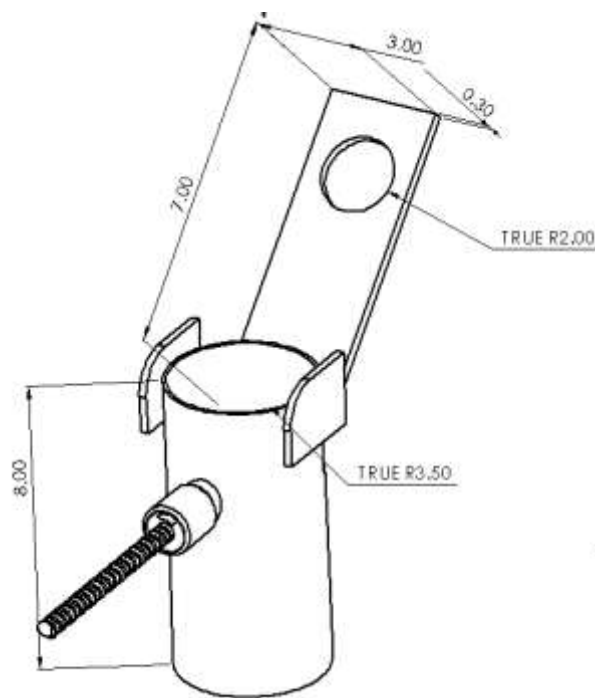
Dimensional Drawing of Welding Torch Holder
